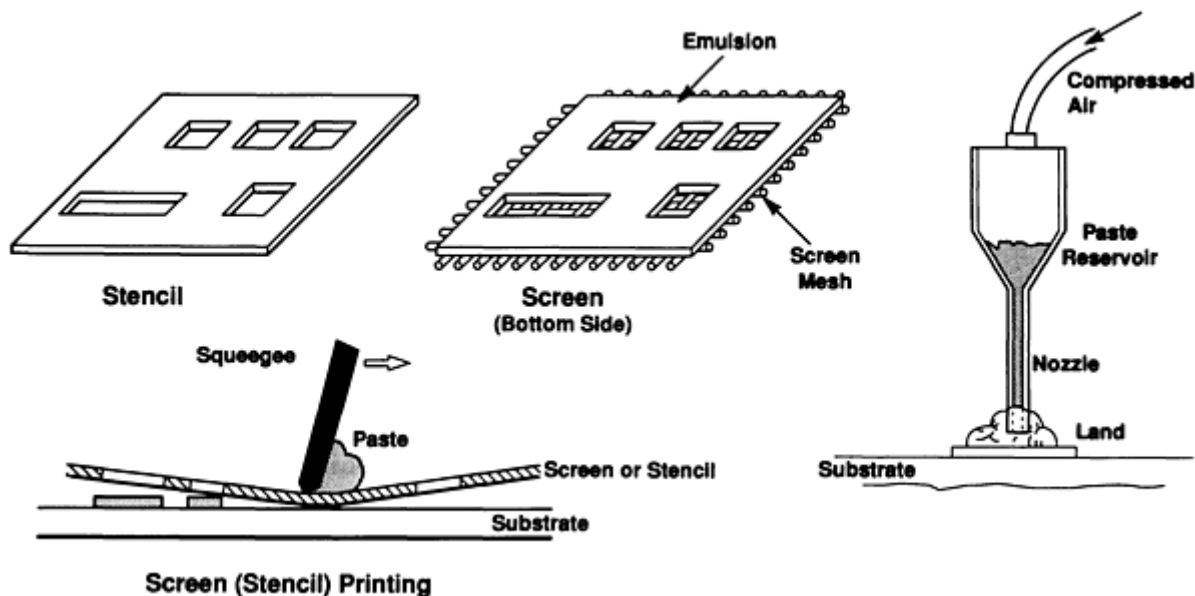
STENCIL PRINTING, SCREEN PRINTING, AND BULK DISPENSING OF SOLDER PASTE
